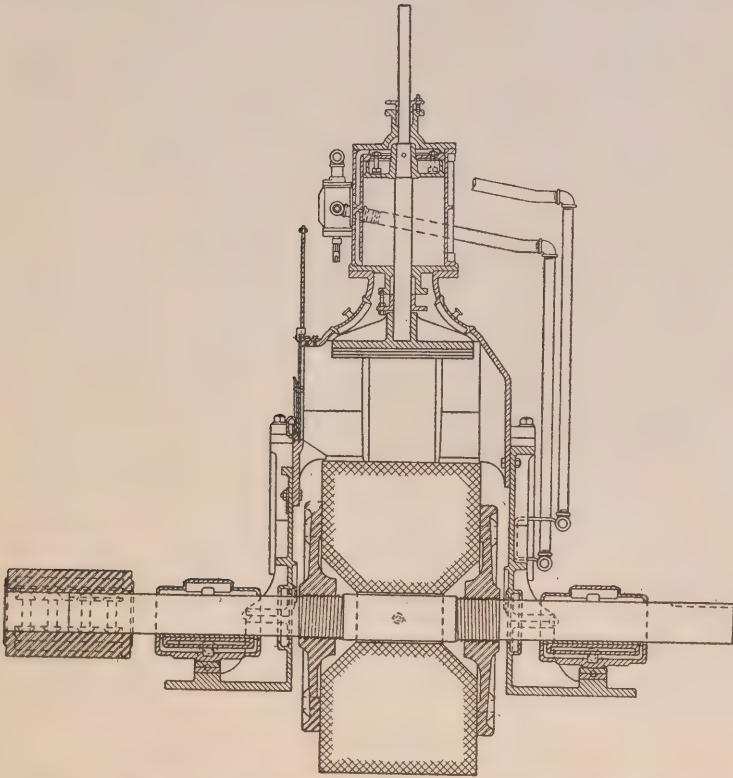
Wood grinder, sectional elevation showing method of securing stone on shafting.
